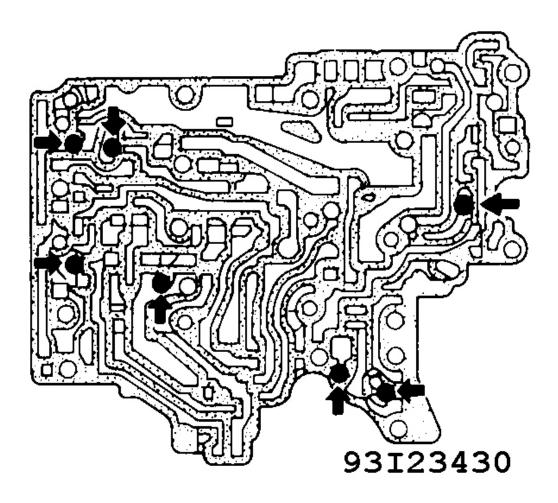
Identifying Steel Ball Locations Courtesy of NISSAN MOTOR CO., U.S.A.
